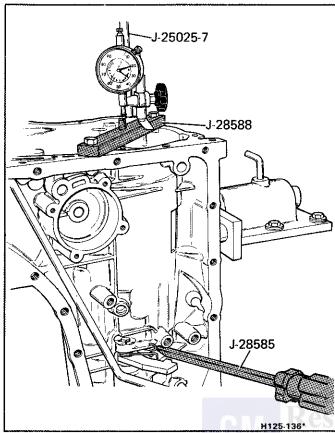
Lo Roller Clutch Race Selective Thrust Spacer
